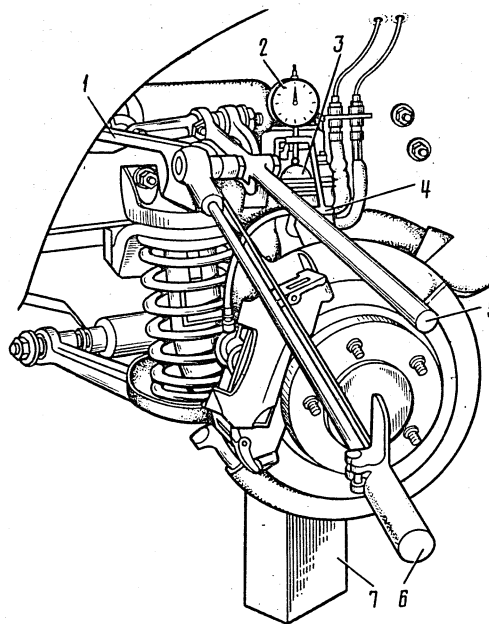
On-Car Checks of Clearance in Suspension Upper Ball Joints:
